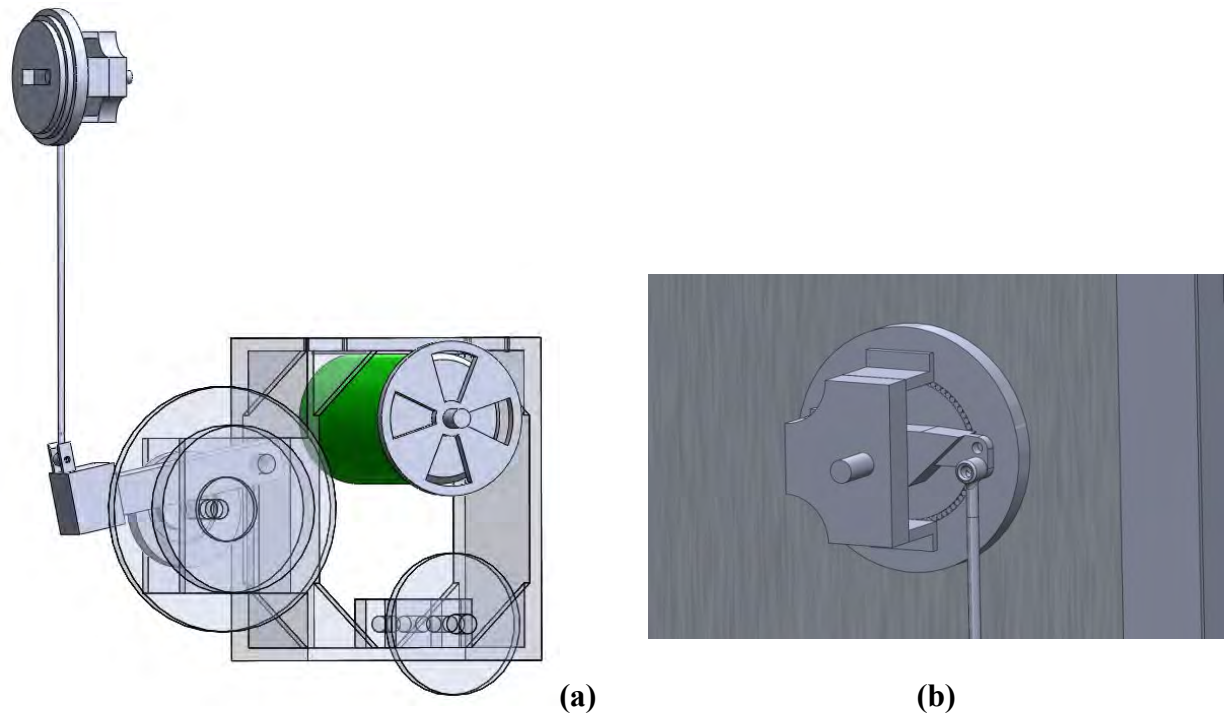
Detail of (a) eccentric disk and drive mechanism, and (b) thrust bearing for pitch oscillation.
